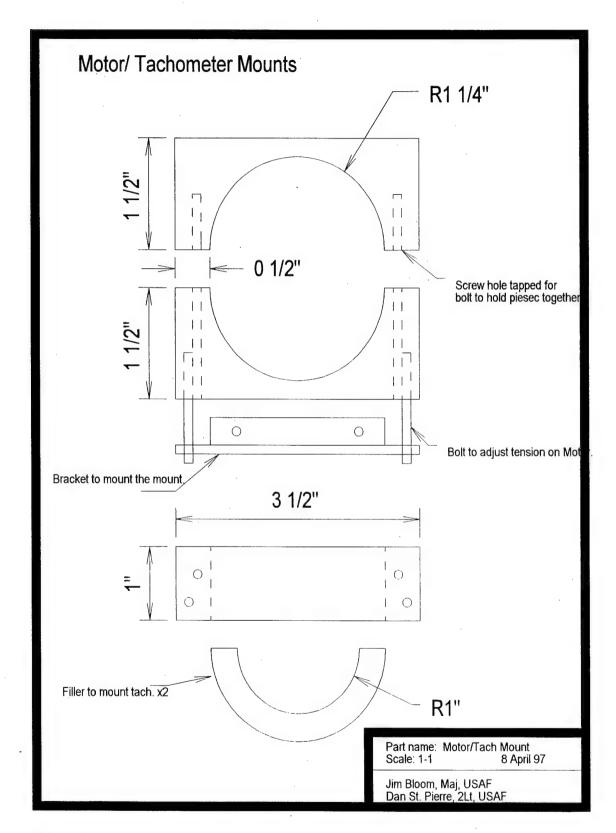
Motor/Tach Mounts. Blocks hold the motor in the middle shelf (Figure 3.4.2.4) in an upright position to drive the reaction wheel. Since the tach is smaller the filler is used.
